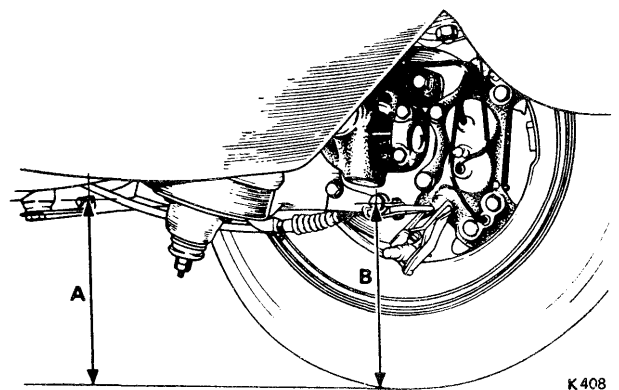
CAR HEIGHT CHECKING POINTS—REAR
